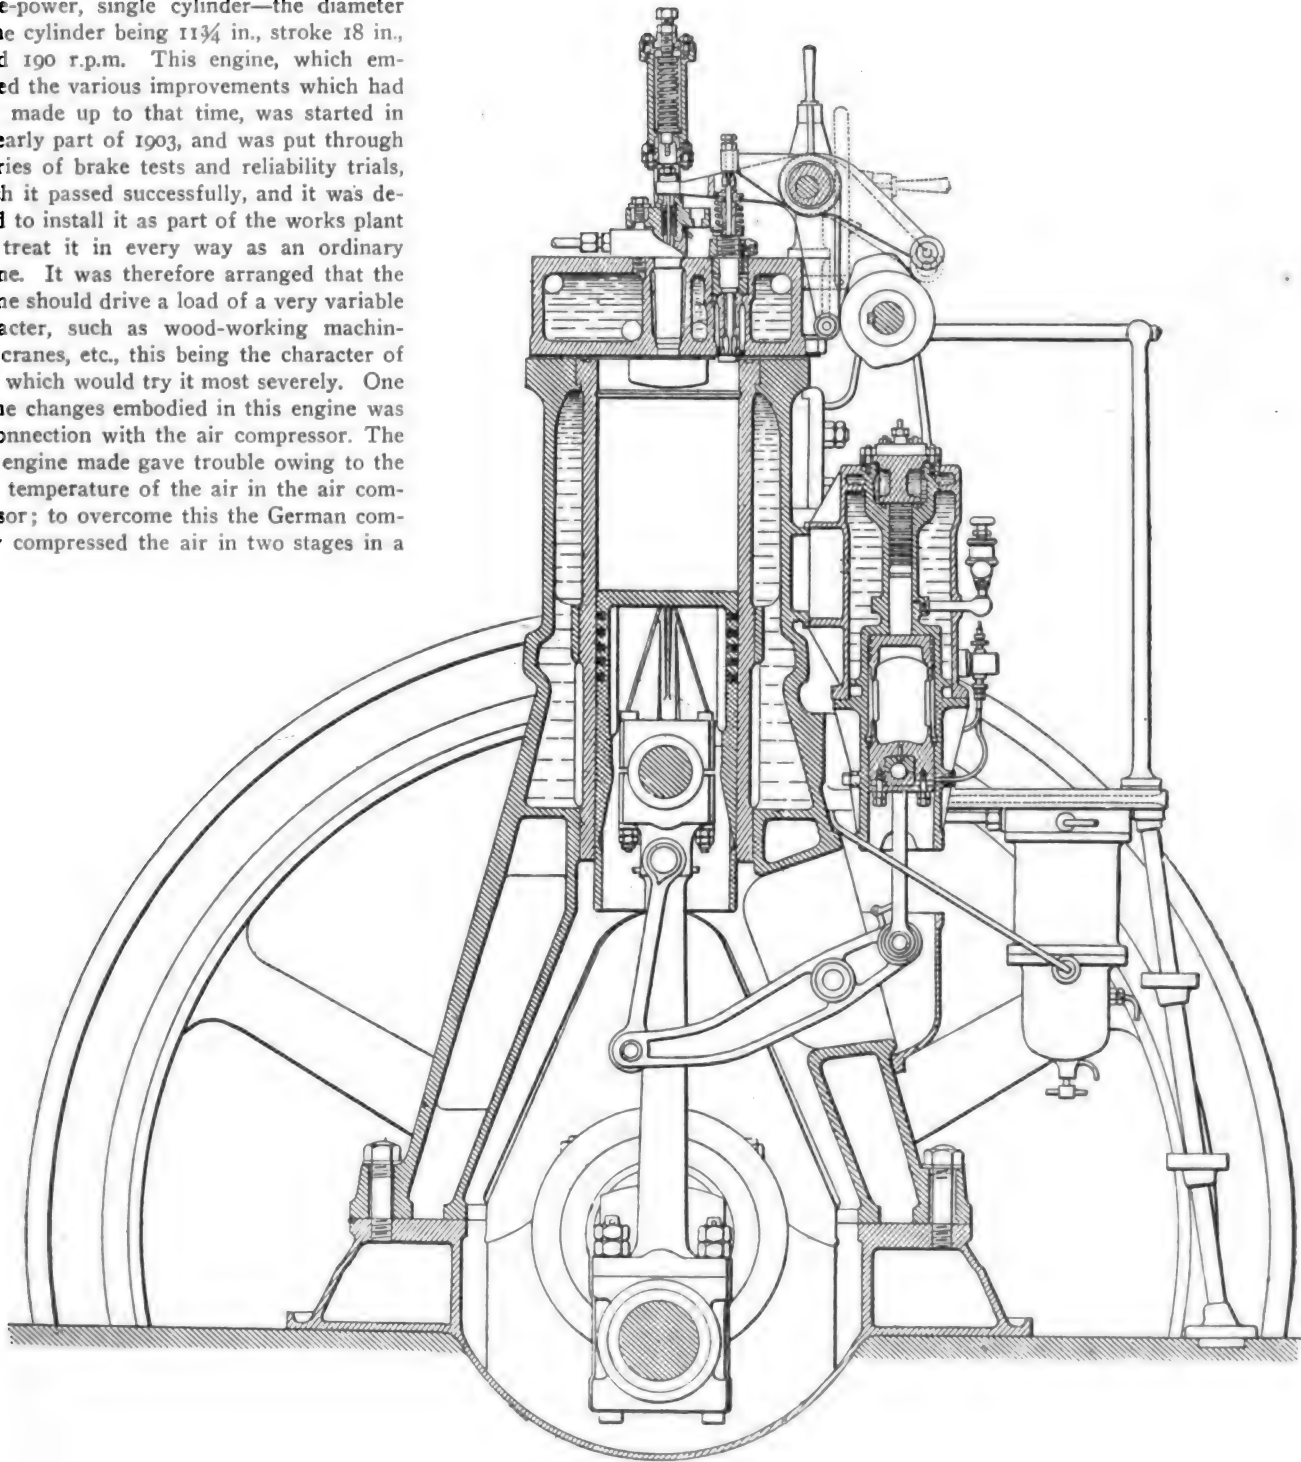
SECTIONAL ELEVATION OF DIESEL OIL ENGINE.
